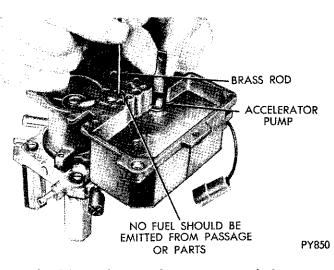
Testing Accelerator Pump Discharge Check Needle
